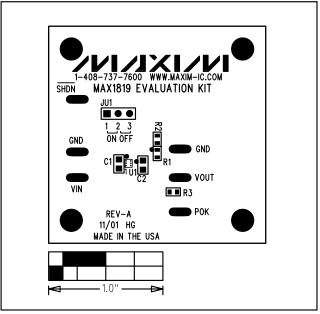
MAX1819 EV Kit Component Placement Guide—Component Side
